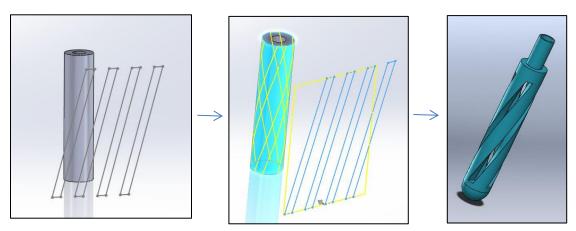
Solidworks progression of NG tip. Left picture is the sketch of the angled slots. Middle picture is the sketch being wrapped onto hollow cylinder. Right picture is final assembly of tip with dome at the distal end and a connector to the larger silicone tubing on the proximal end.
